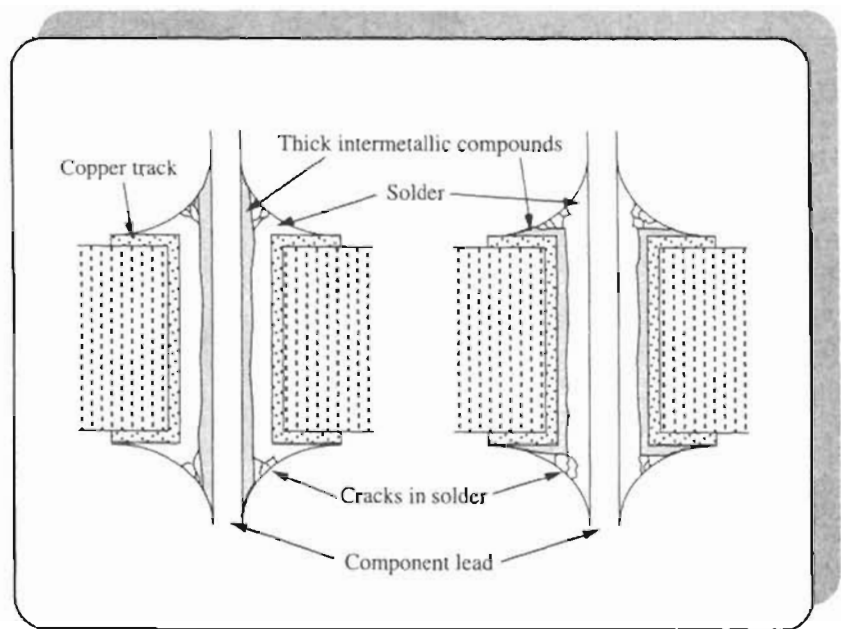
If thick intermetallic layers exist between either component lead and solder (left) or copper track and solder (right), solder may crack
